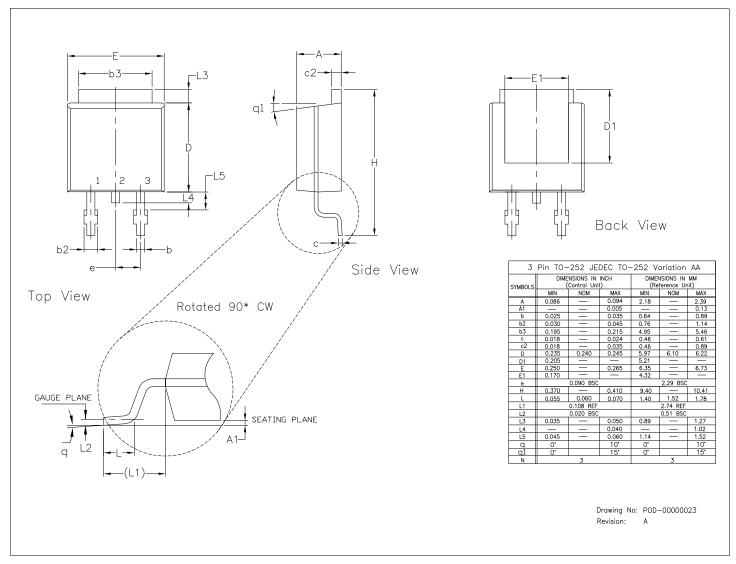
SPX2945 Mechanical Dimensions–3-Pin TO-252
